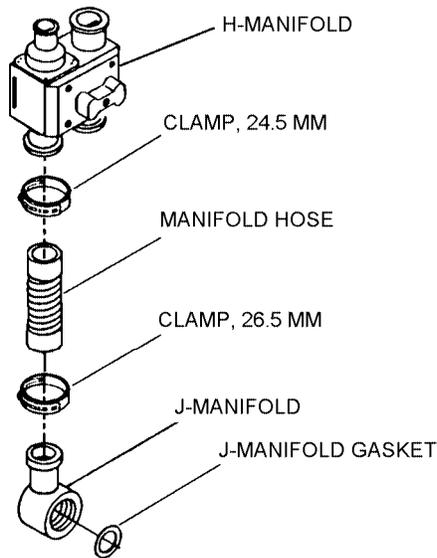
Assembling Right Manifold Hose to H-Manifold and J-Manifold
